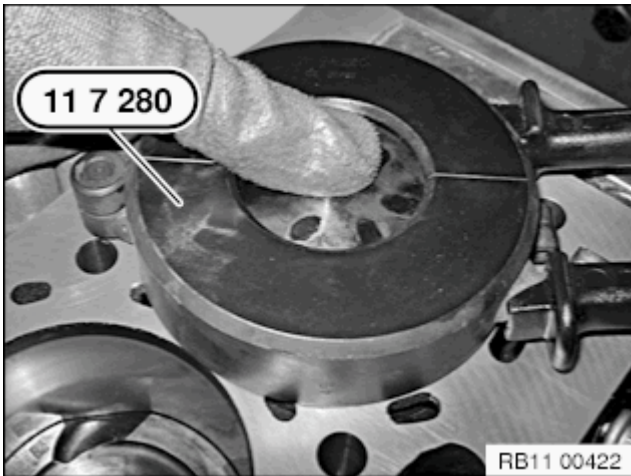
Compressing Piston Rods With Special Tool 11 7 280
